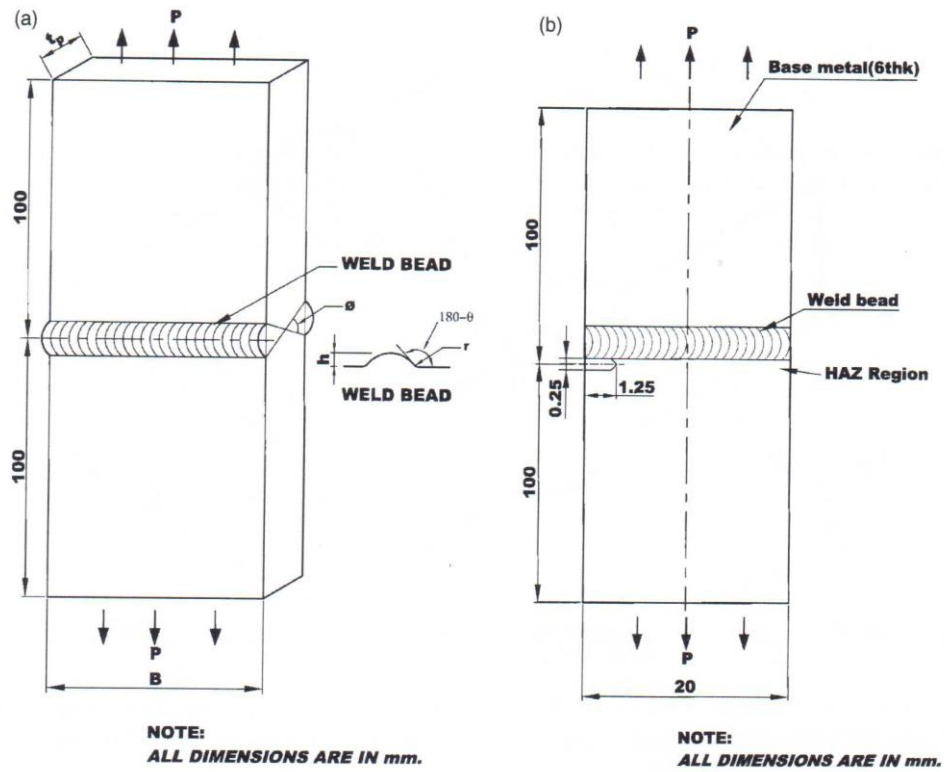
Particulars of specimens: (a) without notch, (b) with notch [5]
